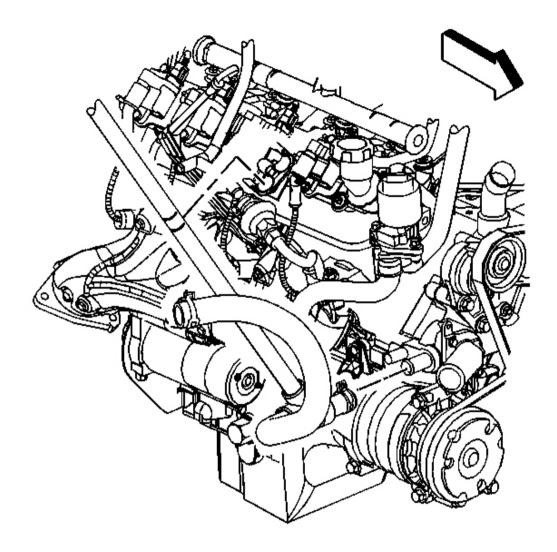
Surge Tank Outlet Hose Courtesy of GENERAL MOTORS CORP.
